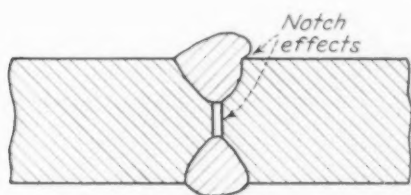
Sketch showing how imperfect welding can produce notch effects which may cause cracks and brittle failures.
